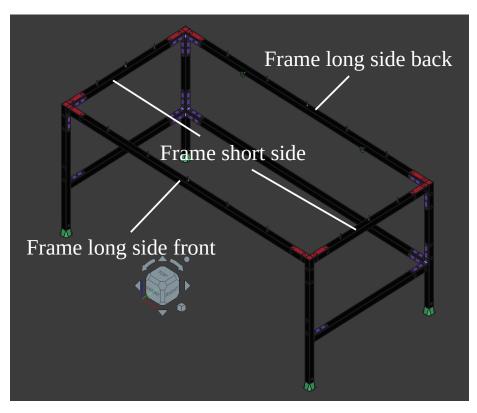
CAD view of the steel frame alone, three-quarter top view.
